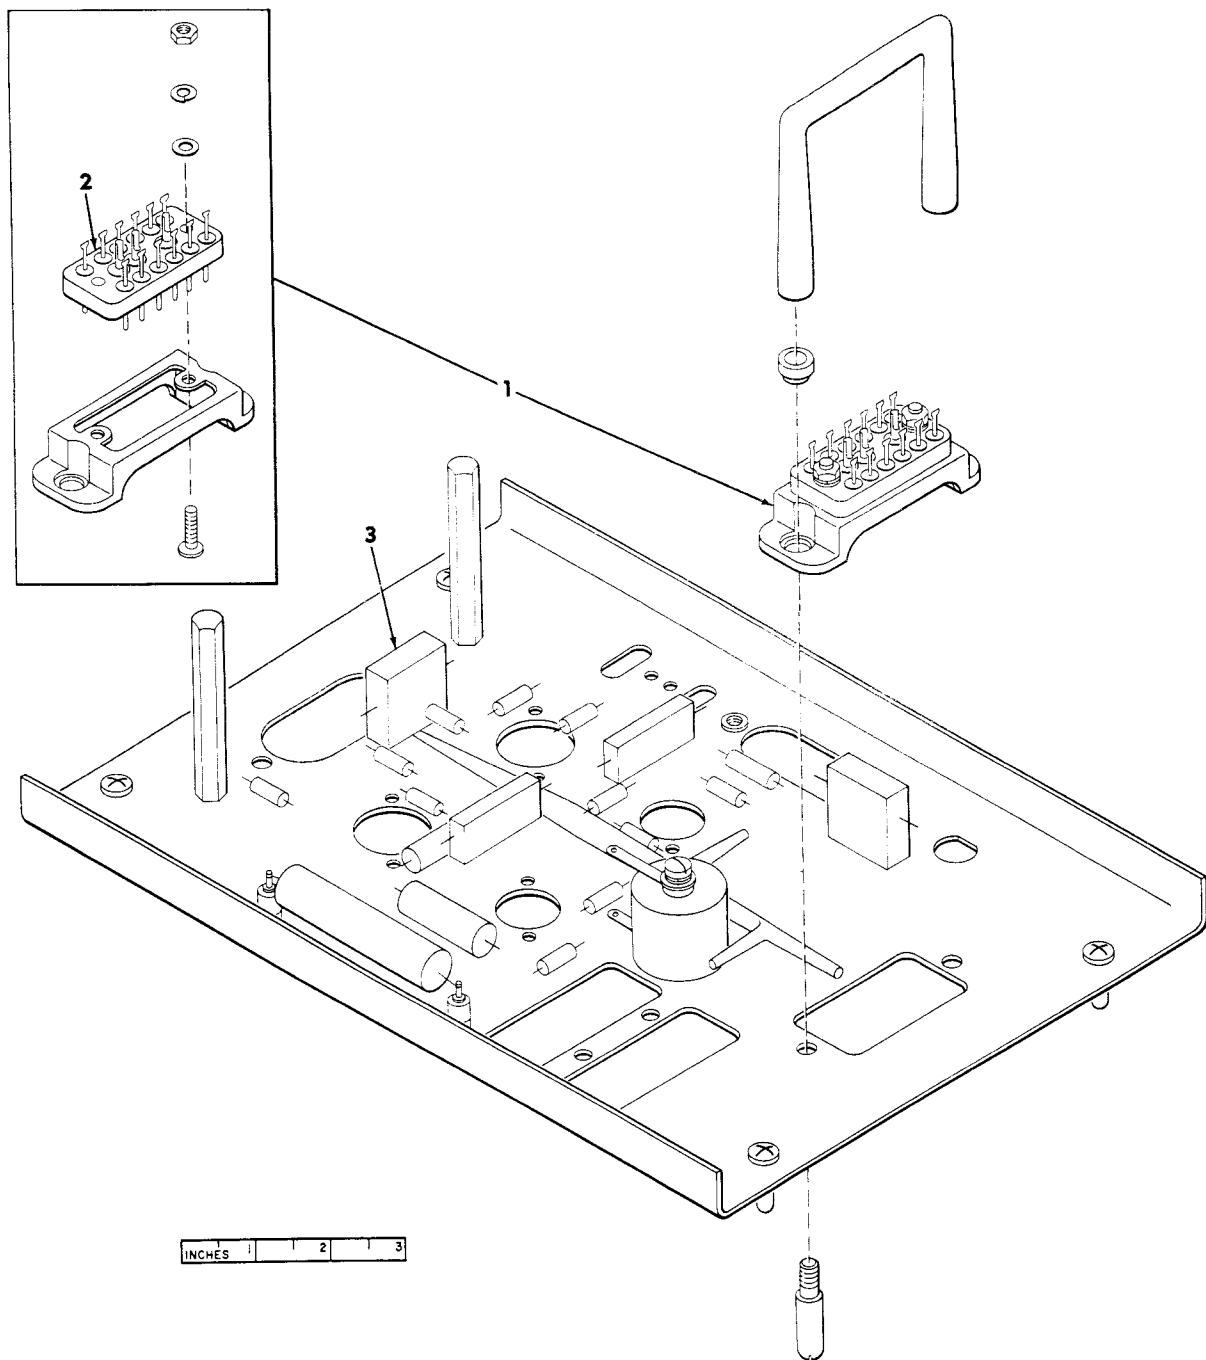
Simulator, radar signal SM-76/M (8009261)—partial exploded view
